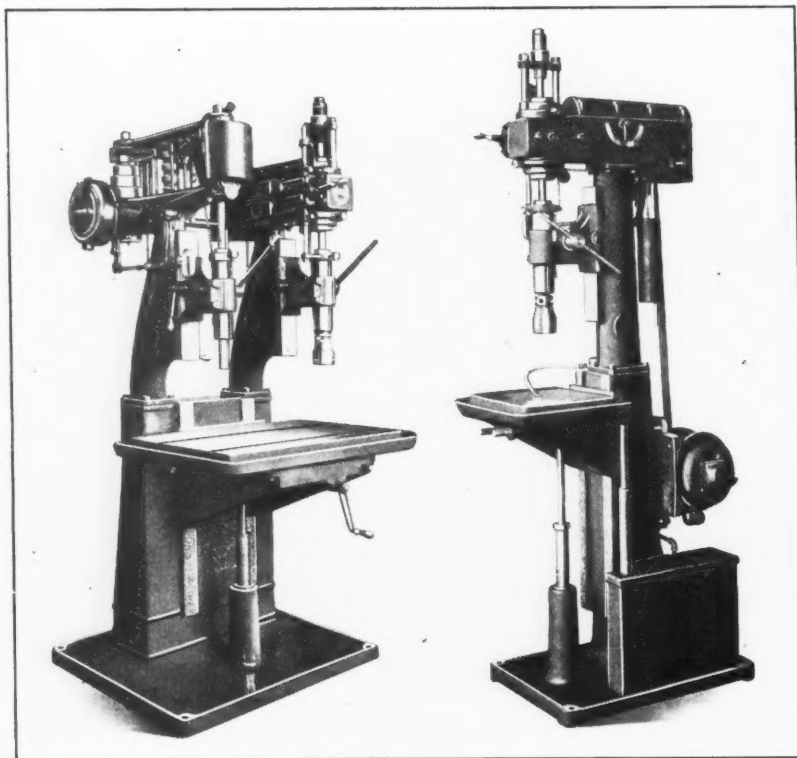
"Hy-Speed" Combined Drilling and Tapping Machine
